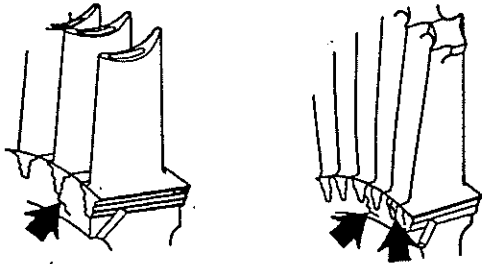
Checking First and Second Stage Turbine Wheel and Blade Roots for Cracks
